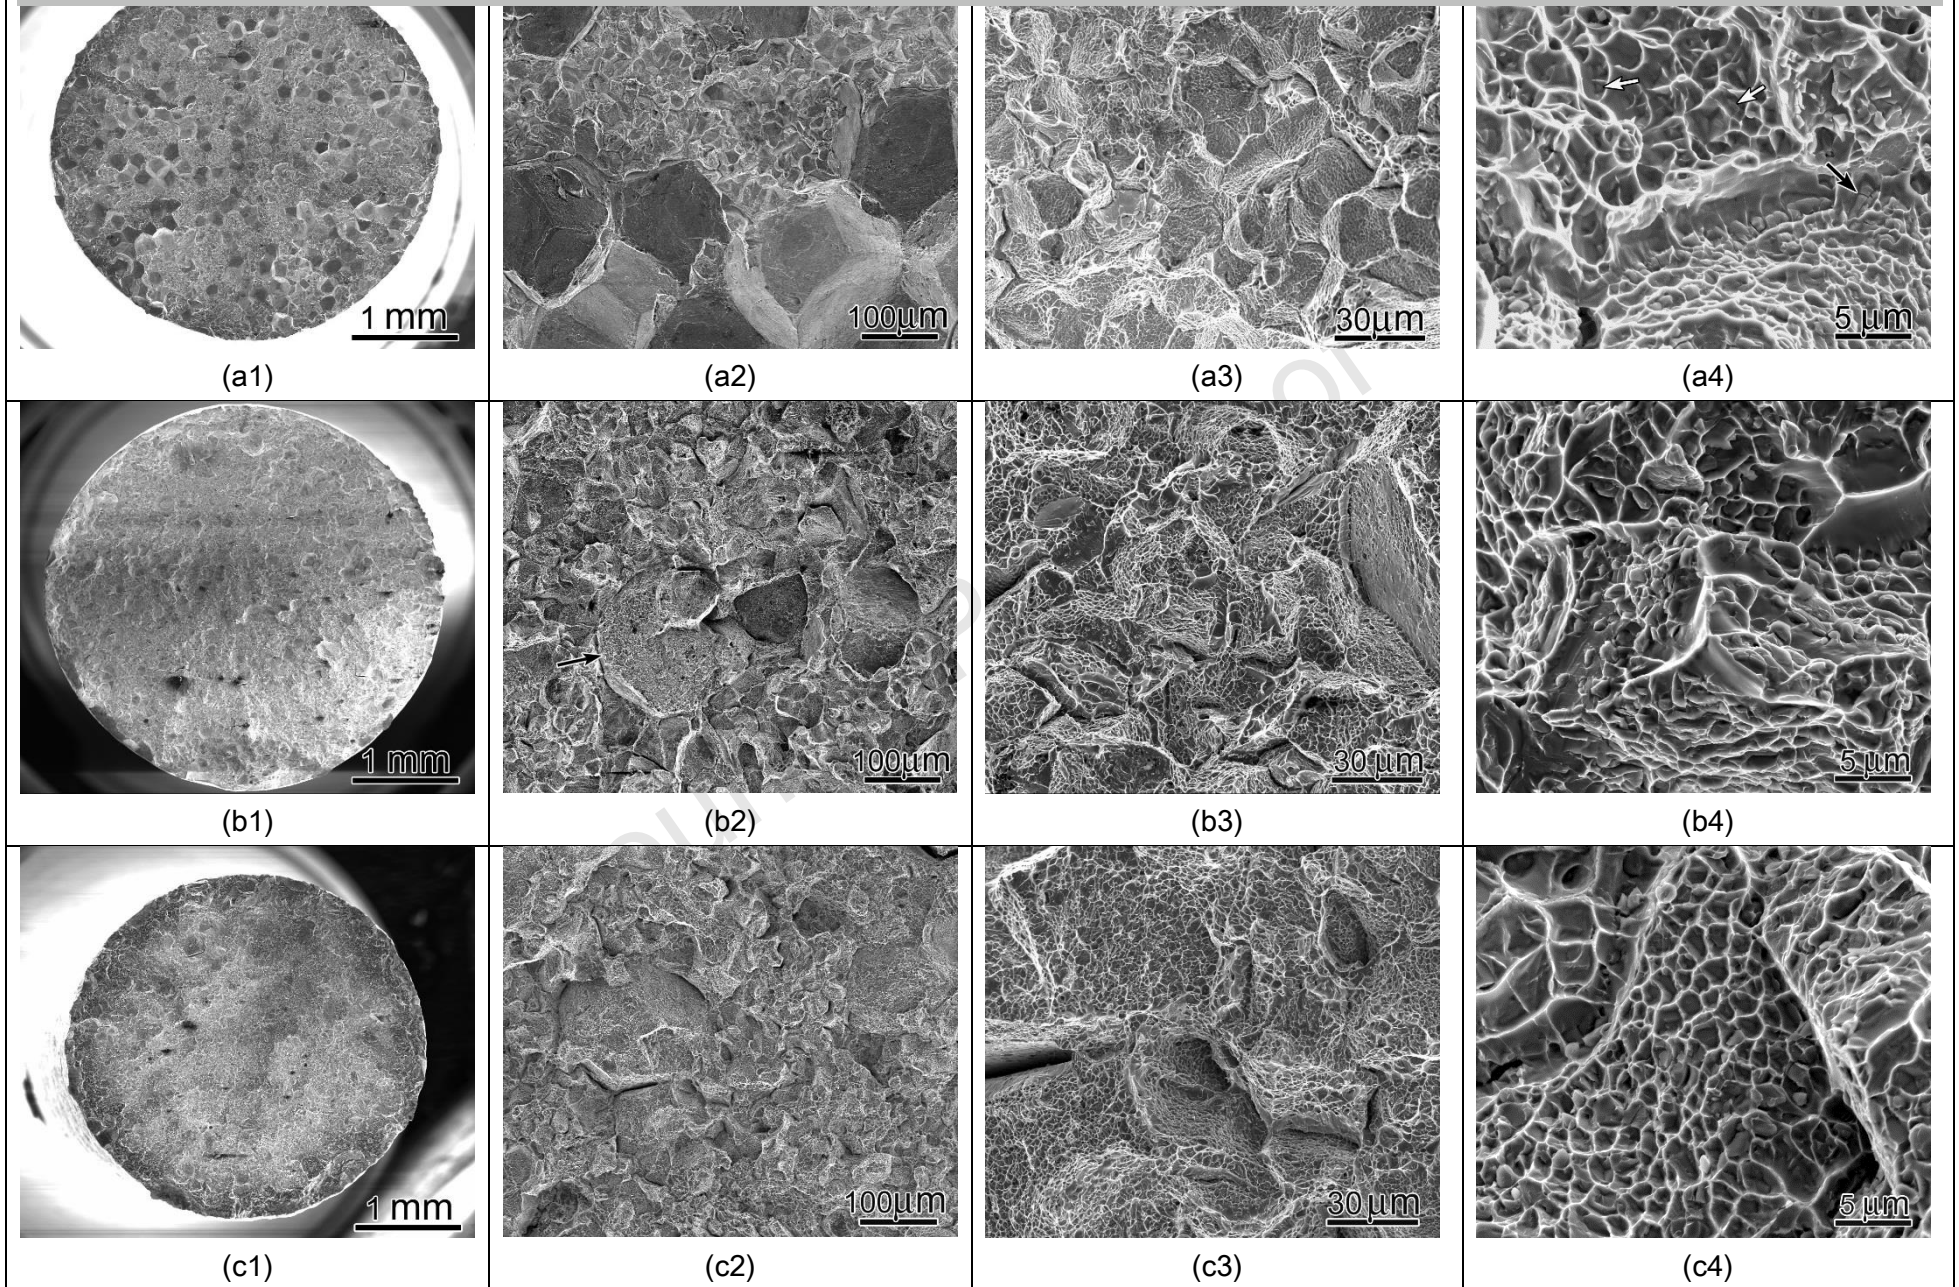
Fractography analysis on fracture surfaces of the tensile failed samples HIPped at (a) 900°C, (b) 950°C, and (c) 980°C at low (1) and high (2-4) magnification.
